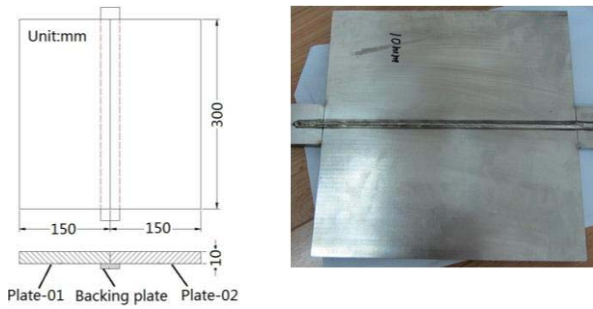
Workpiece dimension and postweld weldment.
